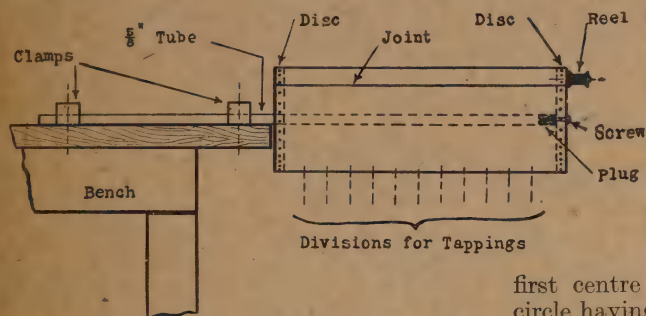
Secondary Cylinder Mounted on Spindle Ready for Winding
